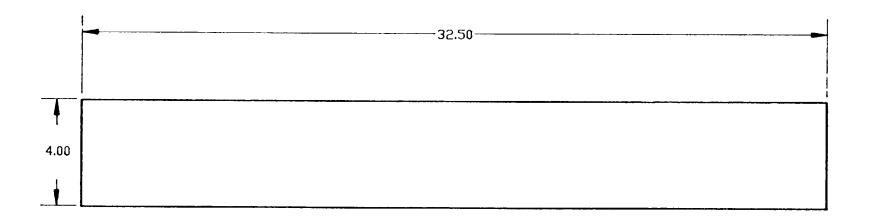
Tool Box Rack Assembly Part Number 20089720-9 (Sheet 9 of 11)
